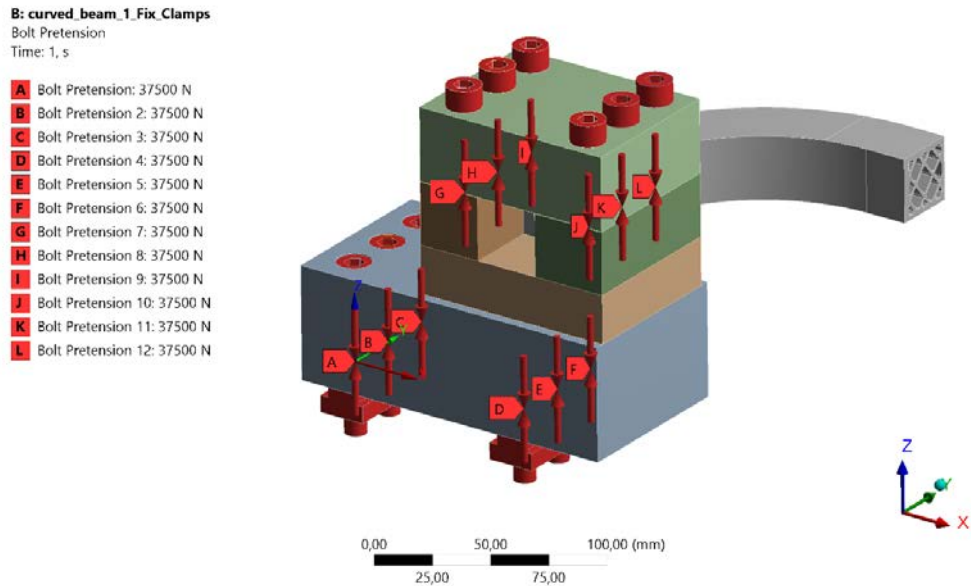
Preload applied to all the twelve bolts that are present in the fix clamp assembly.
